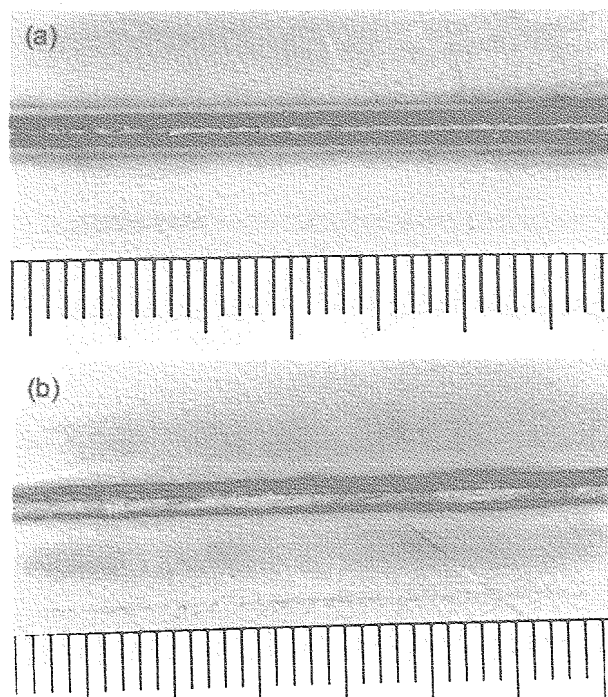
Macrographs of laser welds produced using (a) Argon and (b) Helium as a shielding gas with 30 l/min flow rate
